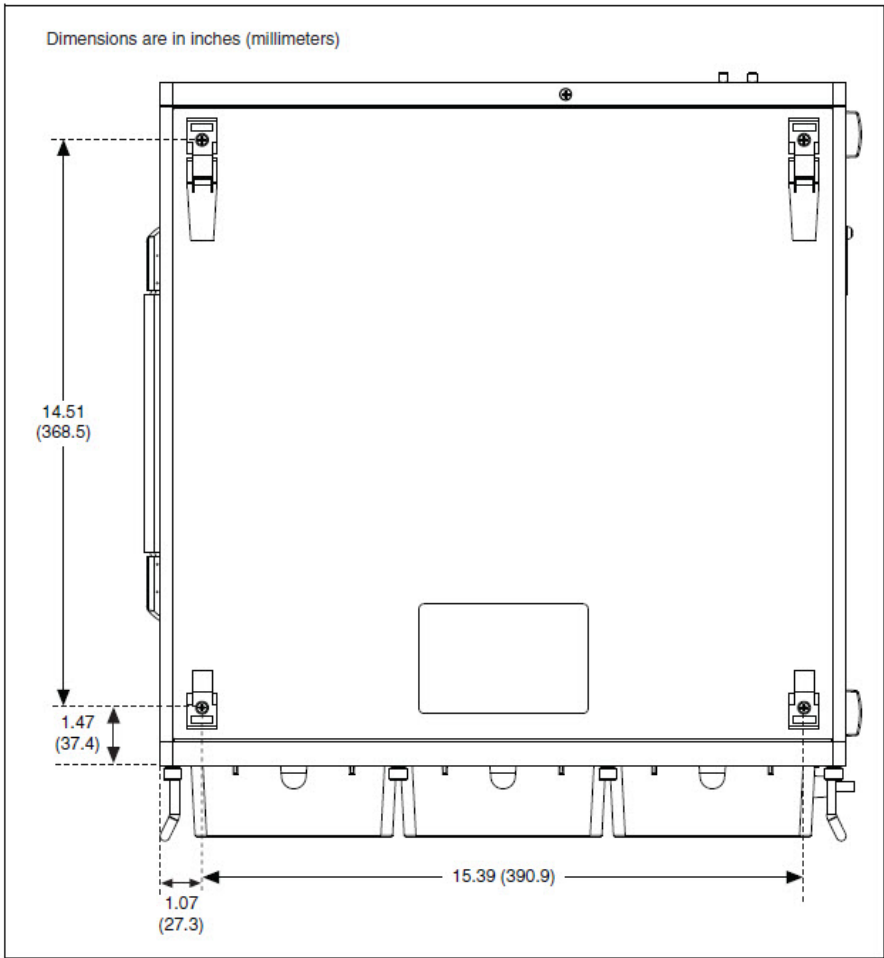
NI PXIe-1085 Chassis Dimensions (Bottom)
